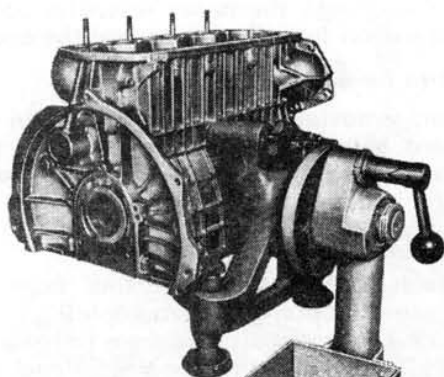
/1 - Cylinder Block Fastened on the Assembly Stand by Means of the MP 1-101 Carrier
